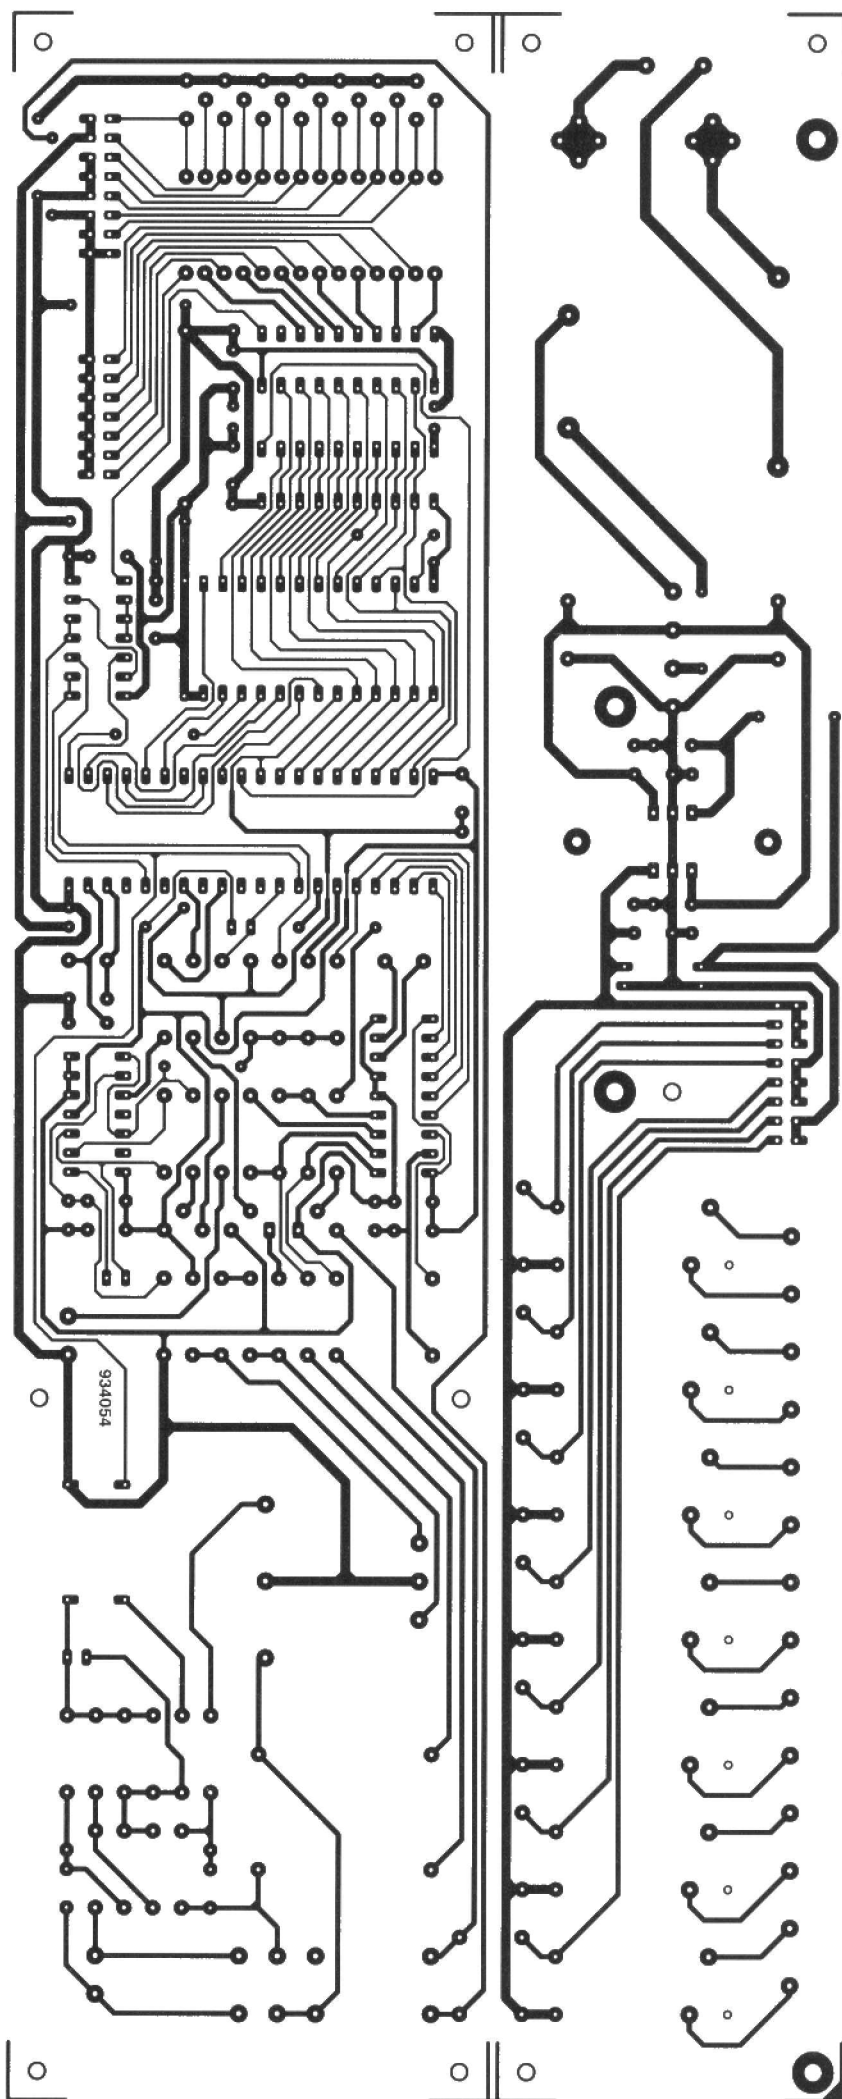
Track layout (direct reading) of the PCB designed for the telephone-controlled switch.
